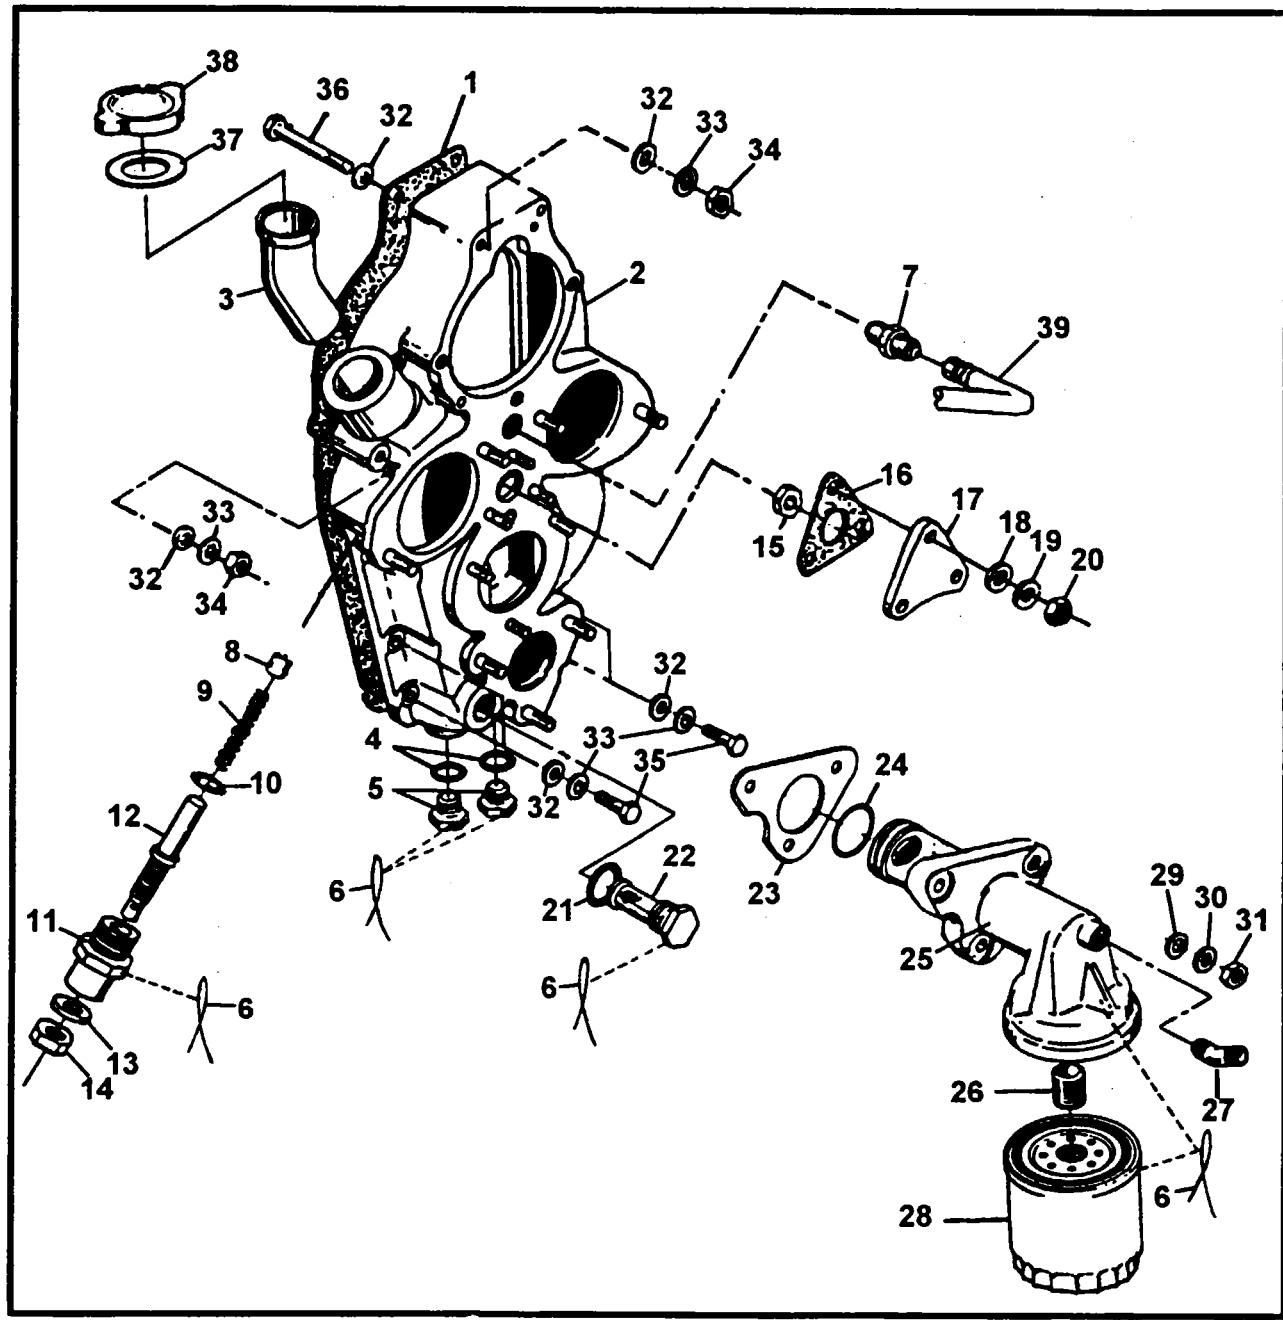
ACCESSORY CASE ATTACHING PARTS (TSI0-360-RB)
